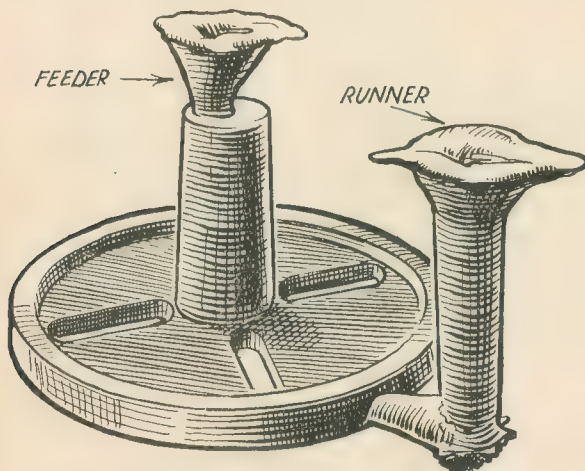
Sketch of unfettled casting for drilling table. The "feeder" helps to make up for contraction in the deep section as the casting cools
